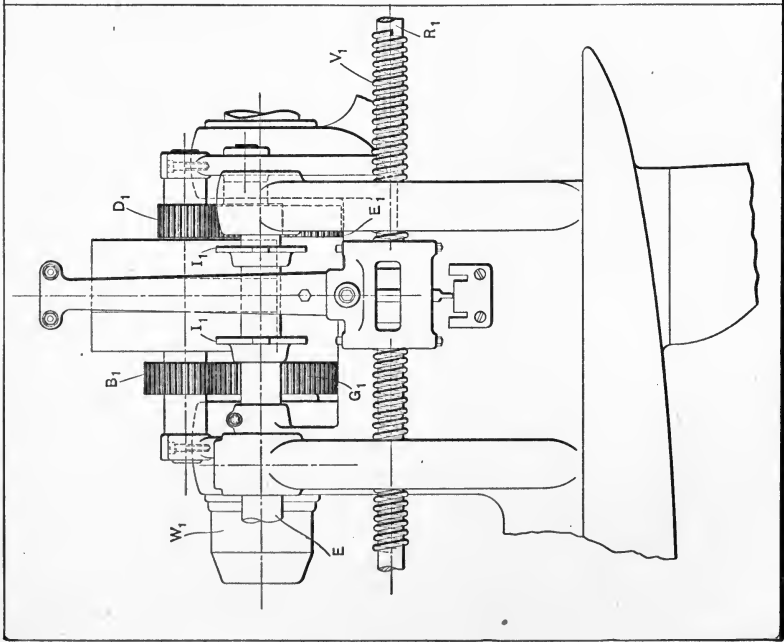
Rear Elevation of Work-spindle End of Machine showing Drive and Belt-shifting Arrangement
